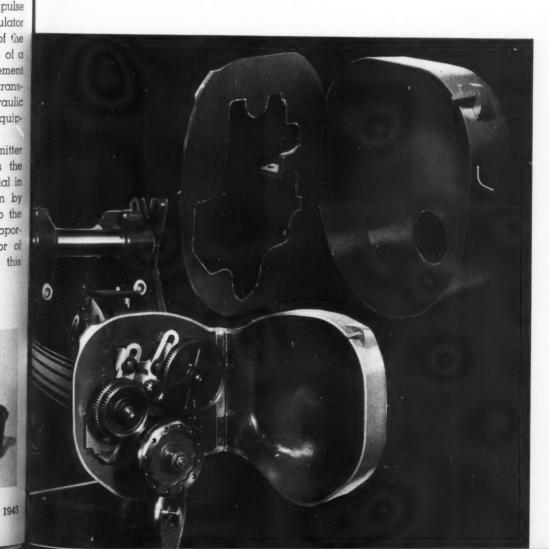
Light weight was satisfactorily maintained in the substitution of sheet steel for cast aluminum in this change-gear guard on a milling machine
